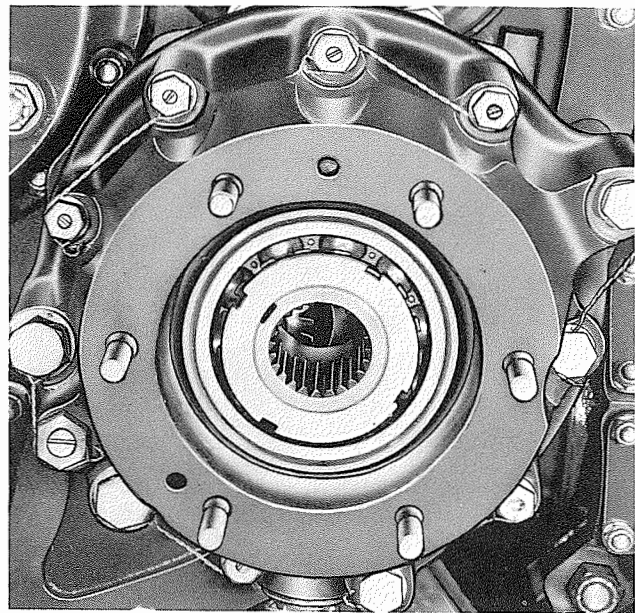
Accessory Drive Gear Box Rear Housing Installed and Lockwired
